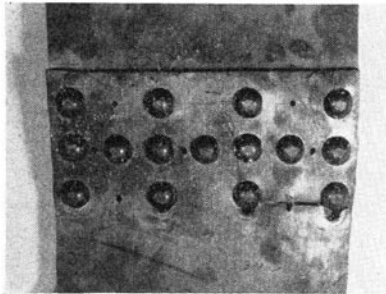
(LEFT). FAILURE BY SHEET TENSION; LAP JOINT WITH TRIPLE ROW OF RIVETS, ALTERNATE RIVETS OMITTED FROM OUTER ROWS, SPECIMEN E-99
